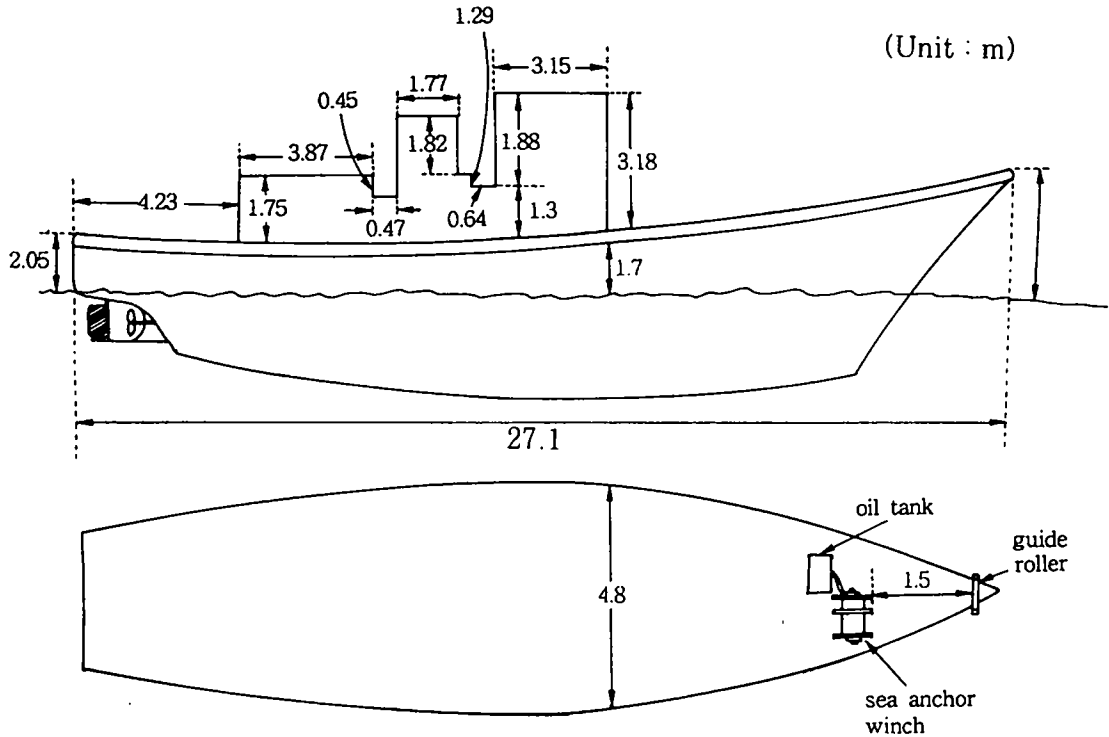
Arrangement of sea anchor winch with One-drum.
